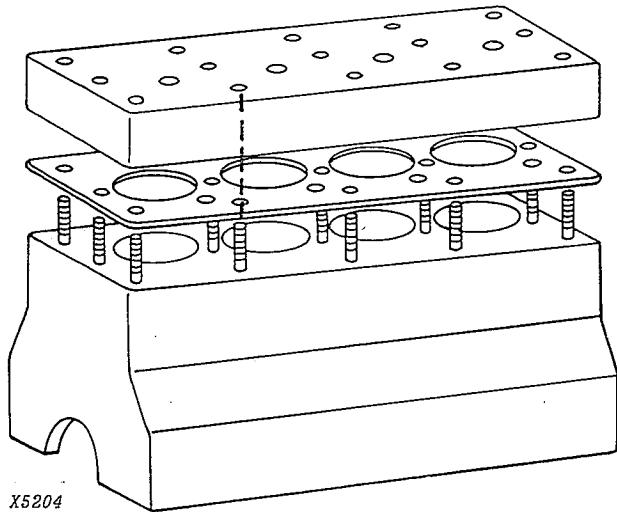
How Studs Simplify the Assembly of Several Parts
